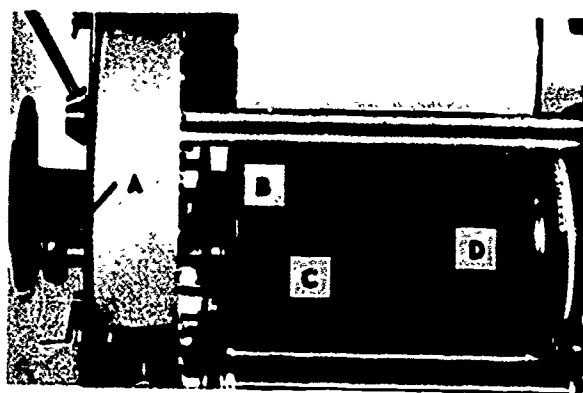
Head clamp on plate cylinder. Press lever (A) to open clamp when mounting a straight-edge plate. Insert plate against stops (B) and close with lever (C).
